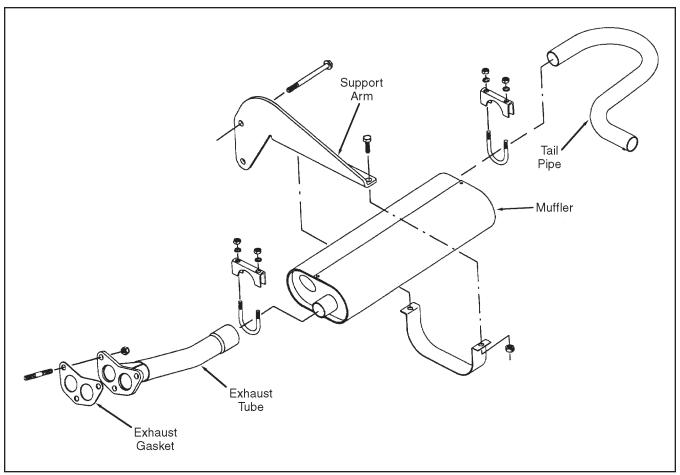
E-7. Muffler and Exhaust System — 4-Cylinder Engine (Suzuki 970)
